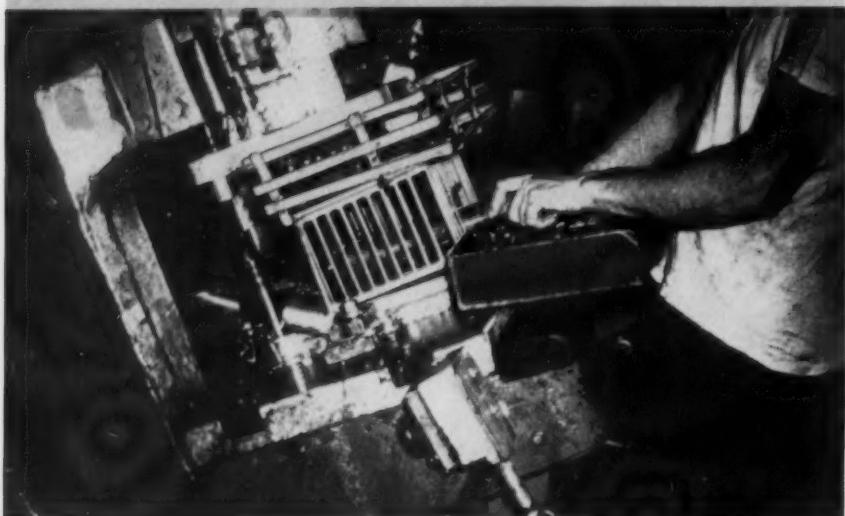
Here is shown a forming operation with the stock fed over a mandrel down to the die which pushes the forward part into
